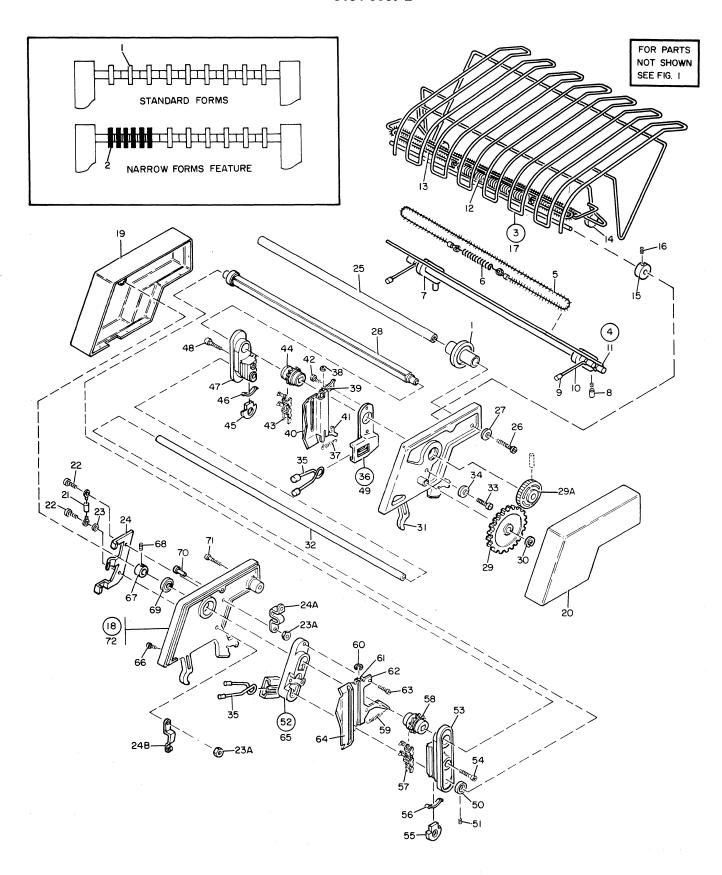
STANDARD AND NARROW FORMS TRACTOR AND GUIDE ASSEMBLY. SEE LIST 4.
